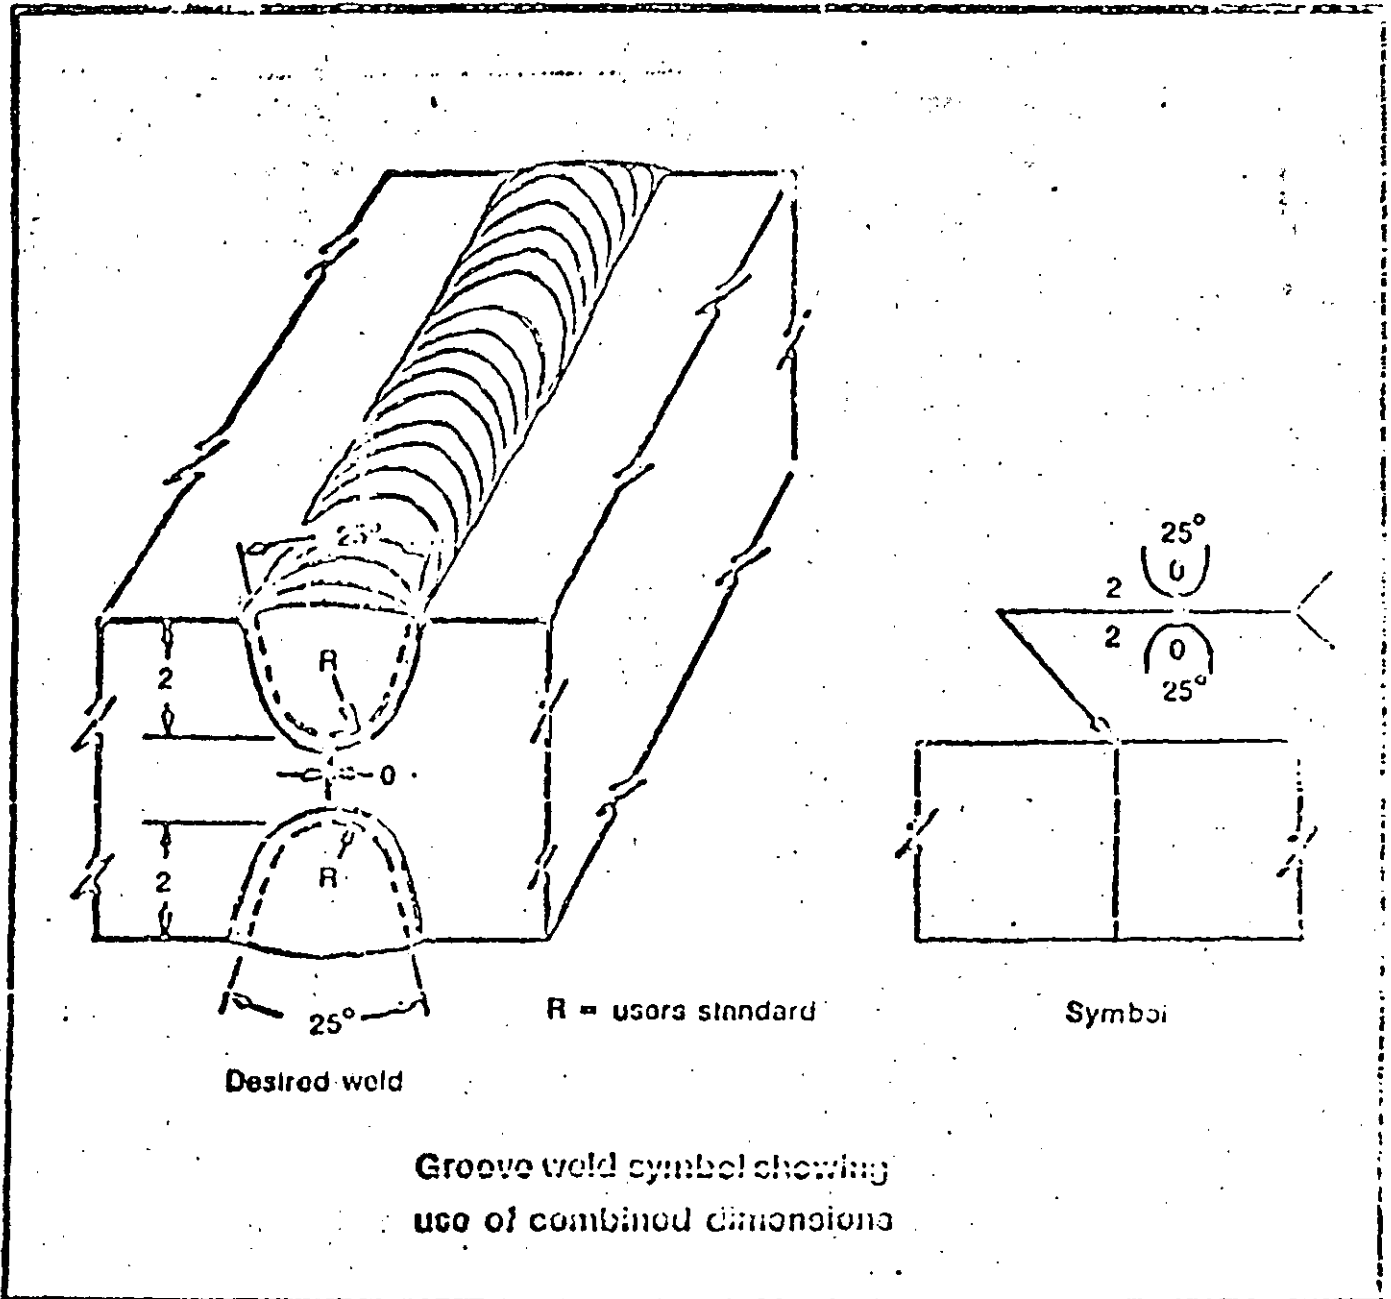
Application of dimensions to groove weld symbols.
